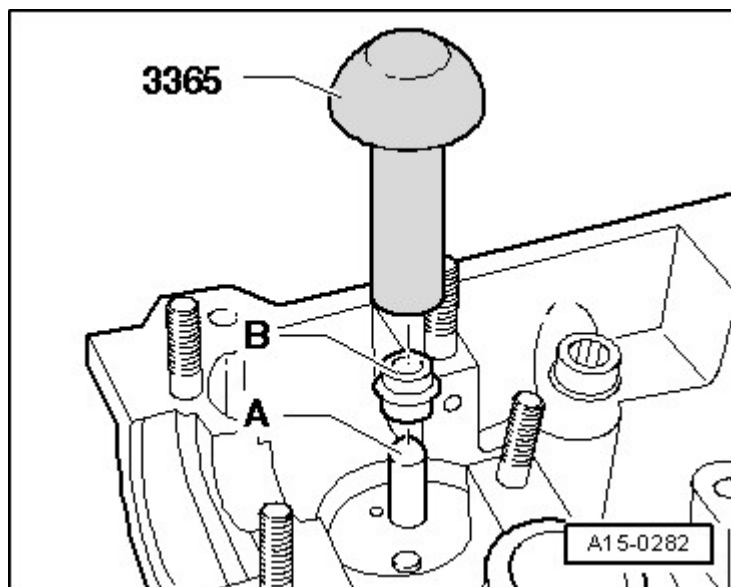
Identifying Plastic Sleeve, New Valve Stem Oil Seals & Valve Stem Seal Driver 3365
